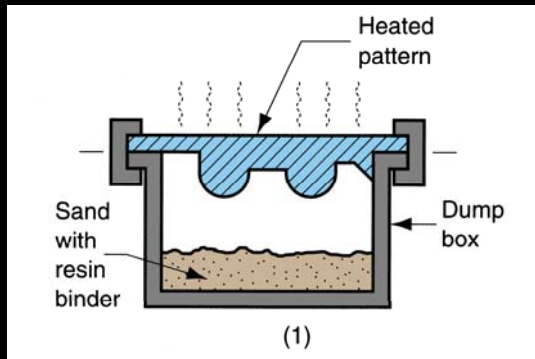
Steps in shell-molding: (1) a match-plate or cope-and-drag metal pattern is heated and placed over a box containing sand mixed with thermosetting resin
